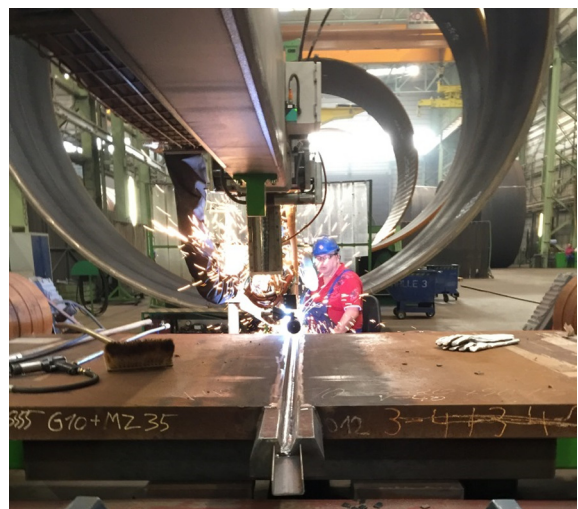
Multi-pass submerged arc welding on S355 G10+M welded mock-up.
